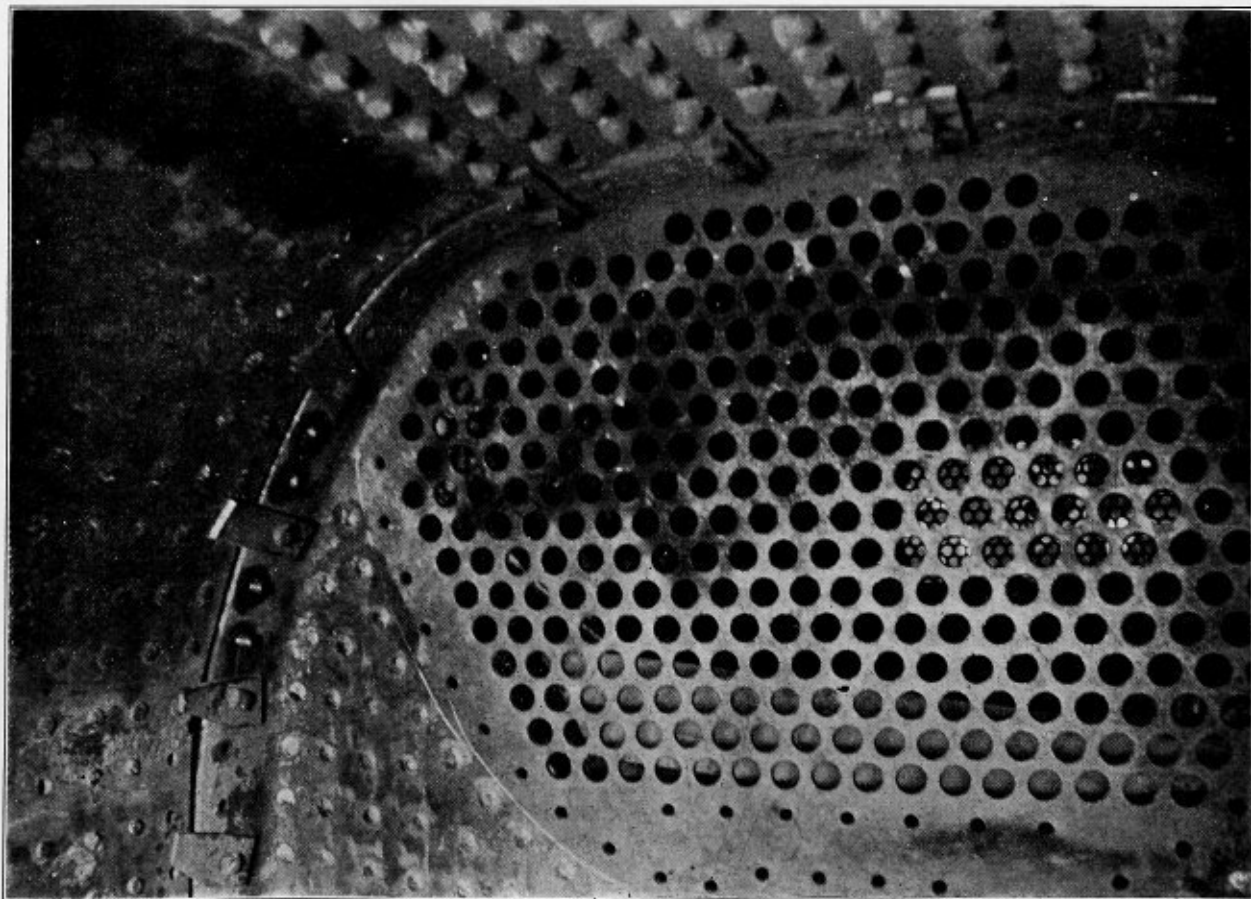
Flue Sheet Fitted Up for Oxy-Acetylene Welding
